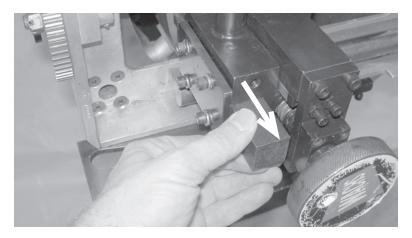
Pull the tool holder back so that the tool stays clear of the pipe face while adjusting the slide.
